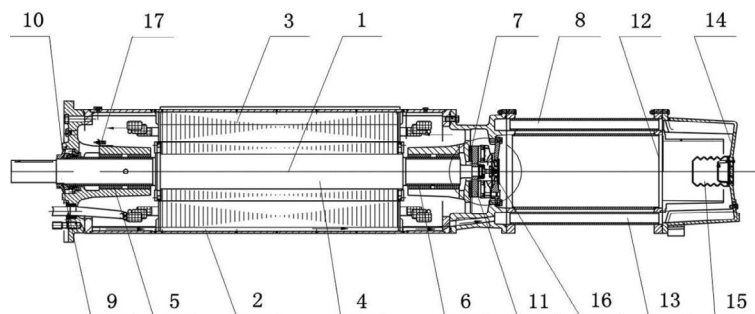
Deep well water-filled submersible motor overall structure diagram. 1-Motor shaft; 2-Motor casing; 3-Stator assembly; 4-Rotor component; 5-Upper guide bearing; 6-Lower guide bearing; 7-Thrust bearing assembly; 8-Cooling radiator; 9-Mechanical sealing device; 10-Sand throwing ring; 11-Thrusting disc; 12-Filter; 13-Cooling water tank; 14-Base; 15-Adjustment capsule; 16-Drive pump wheel; 17-Poor water sensor.
